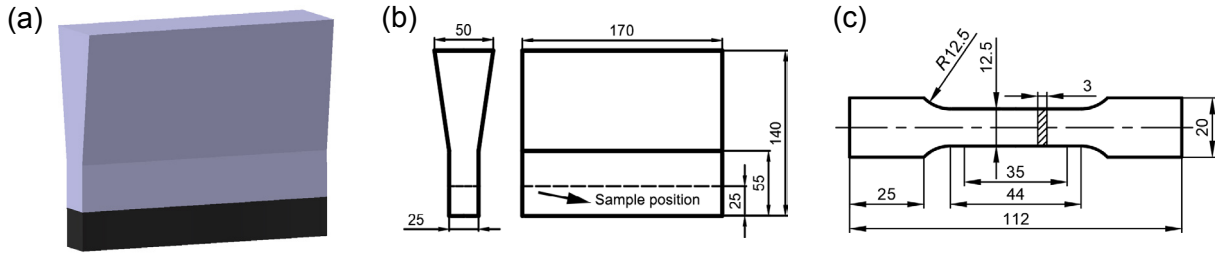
Configuration of the Y-shaped block casting and tensile specimen: (a) 3D model of the Y-shaped block; (b) dimension of the Y-shaped block and sampling position; (c) dimension of tensile specimen (unit: mm)
